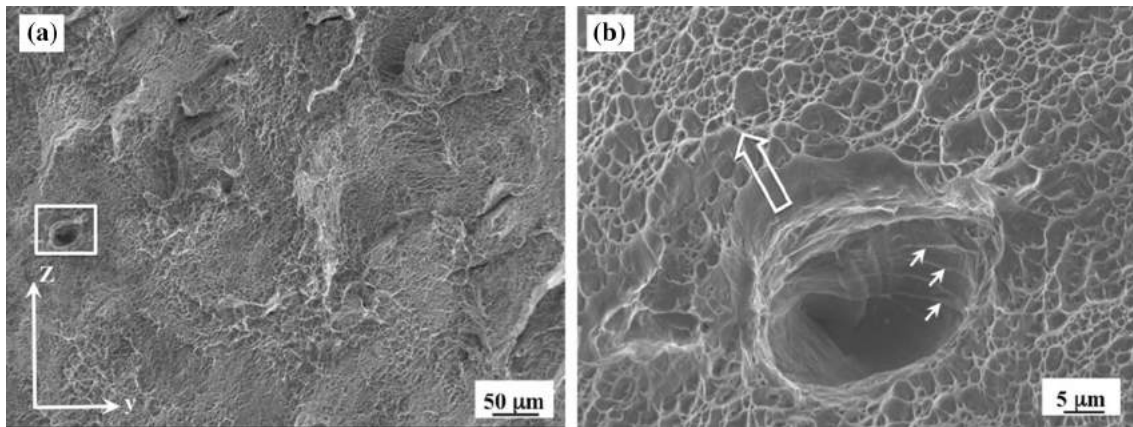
Fractography of the 799 °C annealed samples, (a) fracture surface displaying ductile rupture, (b) the highlighted region in (a) presenting pore-induced cleavage fracture indicated by the large arrow, the shorter arrows show the deposition layers in the pore
